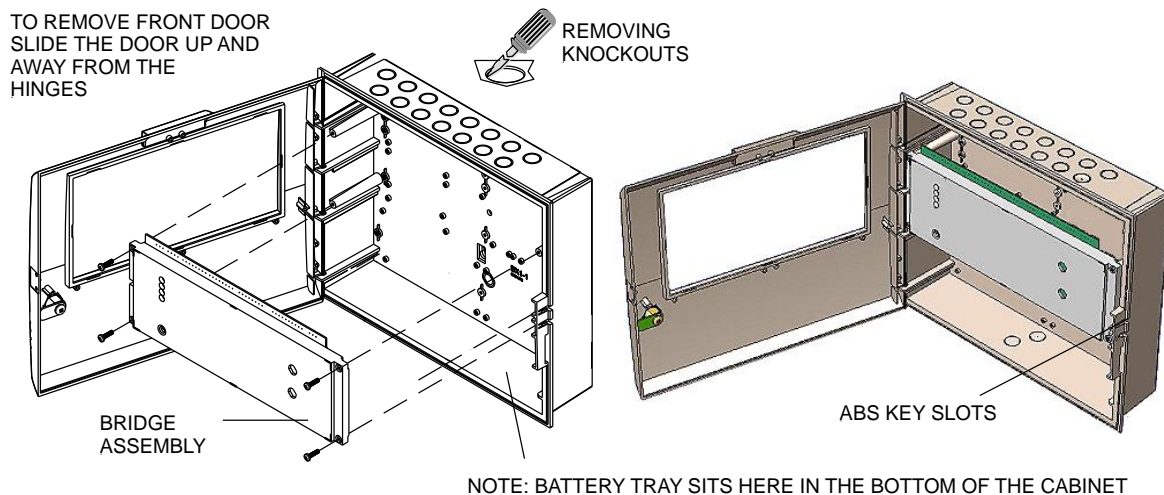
Exploded and assembled view with 003 Key entry (BX1)
